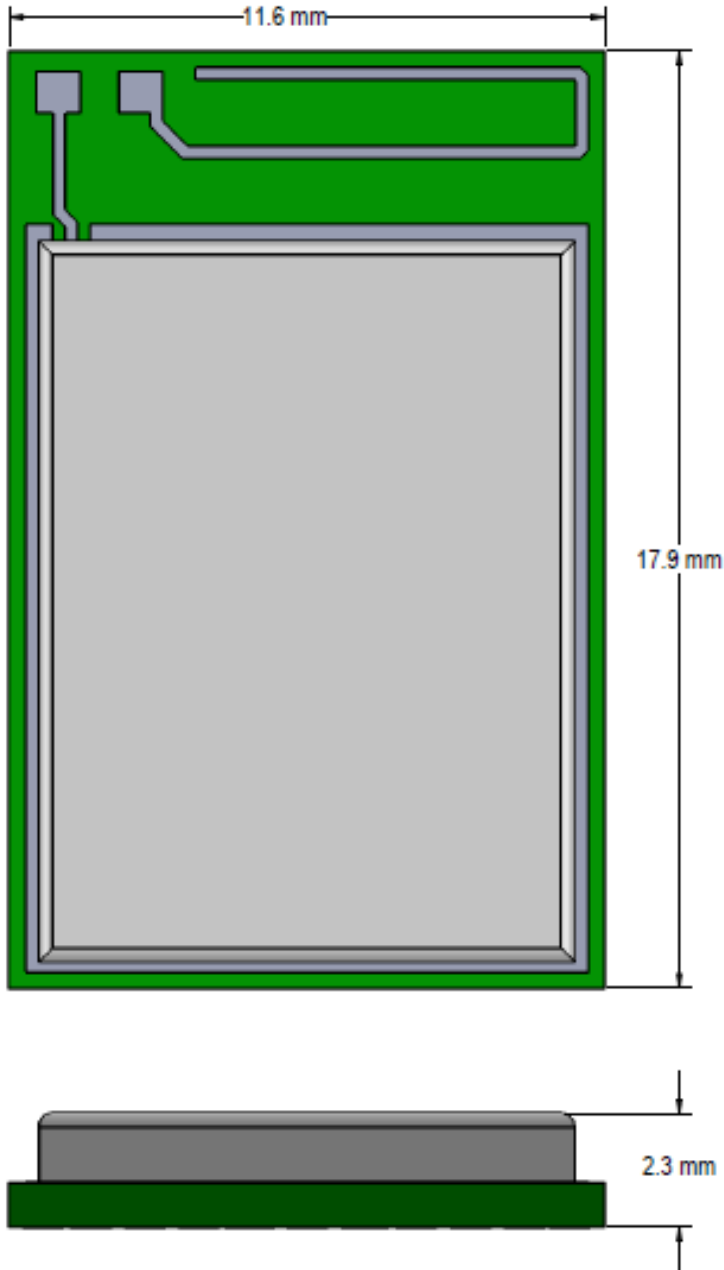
Module Mechanical Dimensions (Maximum Module Height = 2.4mm)
